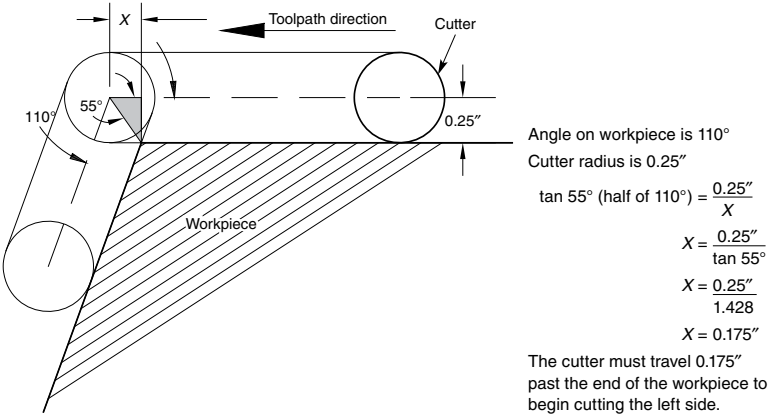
The triangle that must be solved to calculate the position of the end mill when cutting an obtuse angle on a workpiece.
